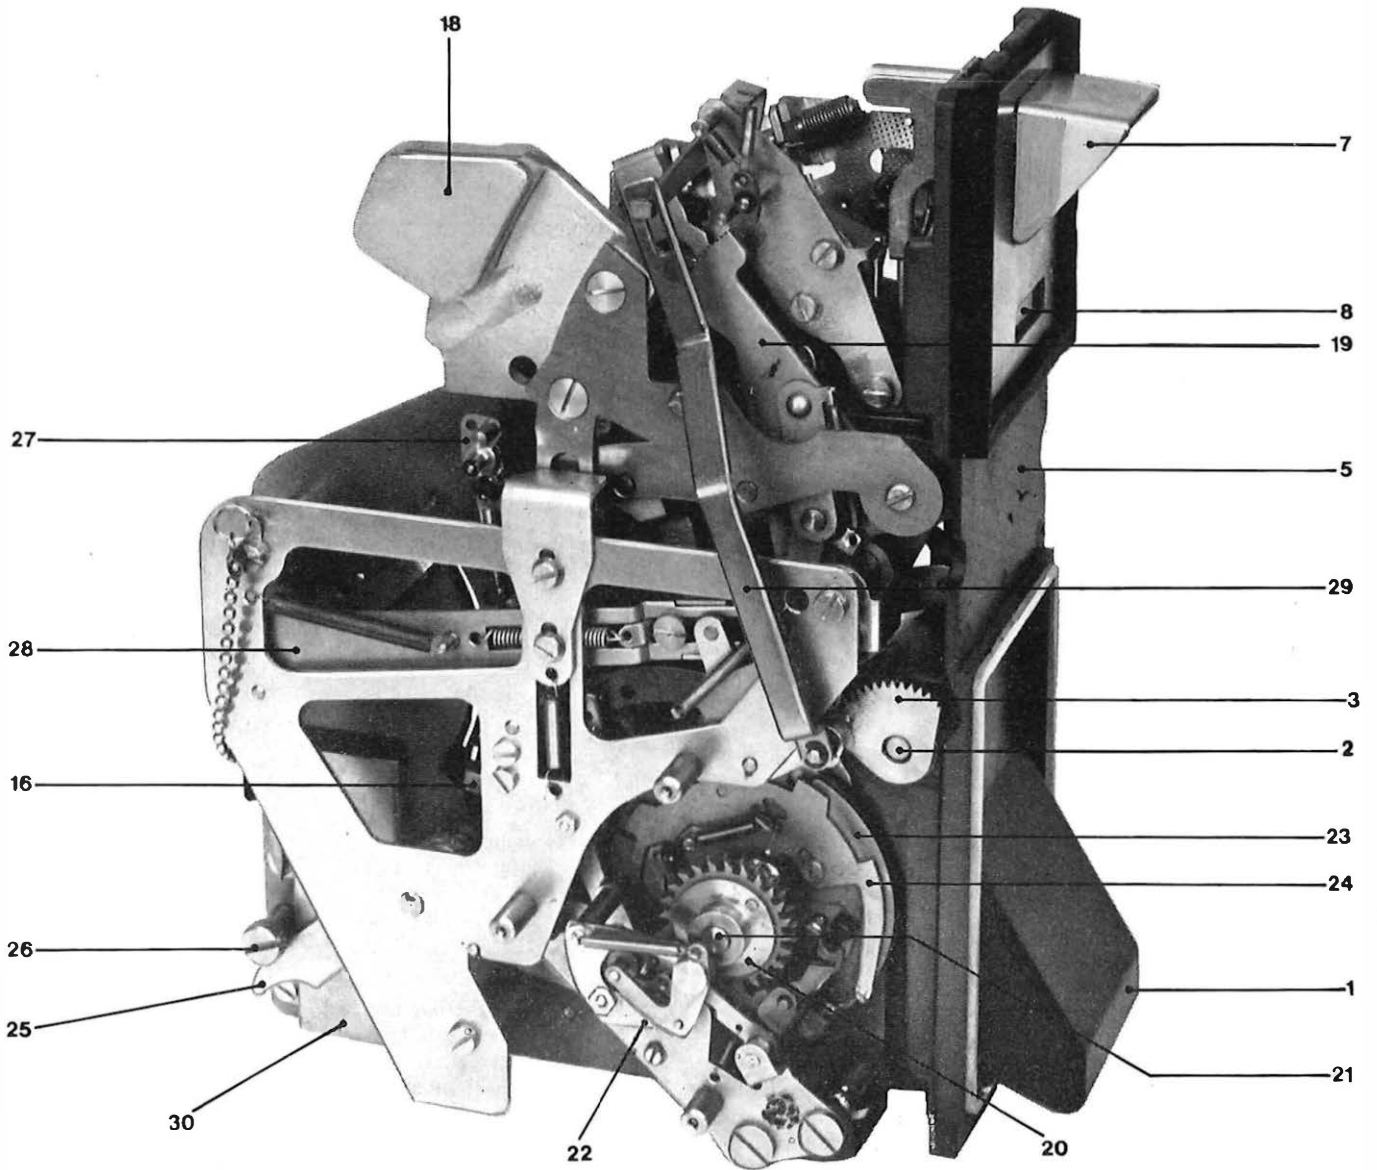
The Stamp-Selling Machine Type G, left-hand view
